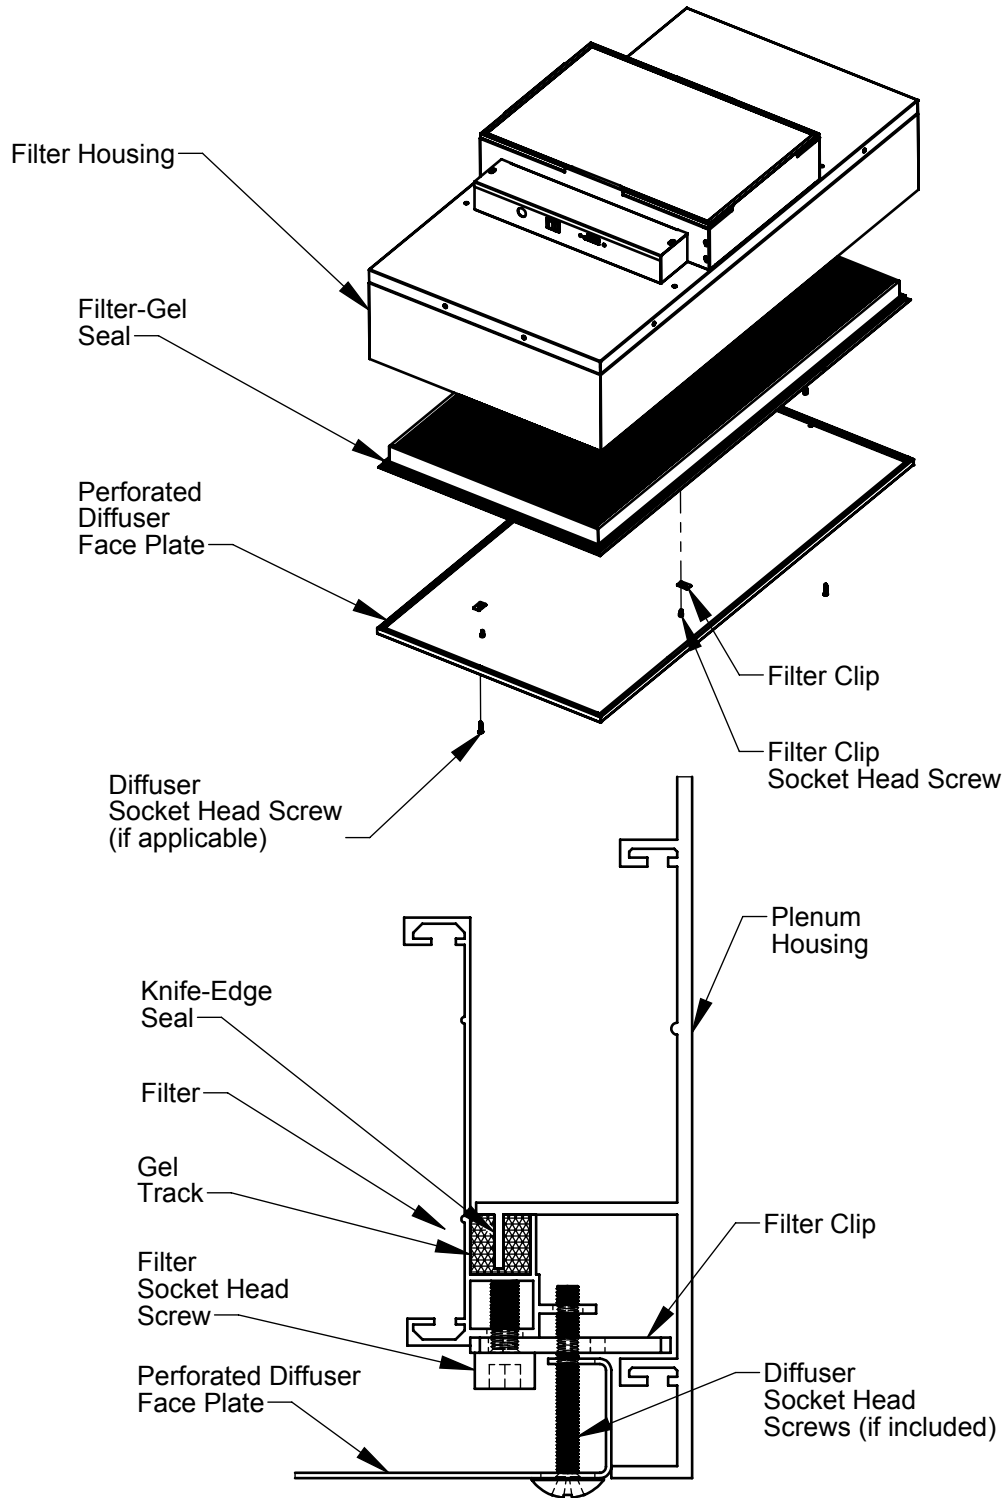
RSR Filter Replacement (Extrusion Construction)
